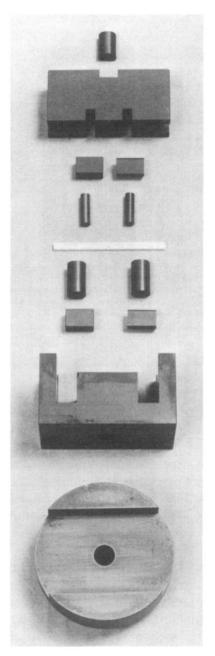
Component parts of a typical articulating roller high temperature bend fixture.
